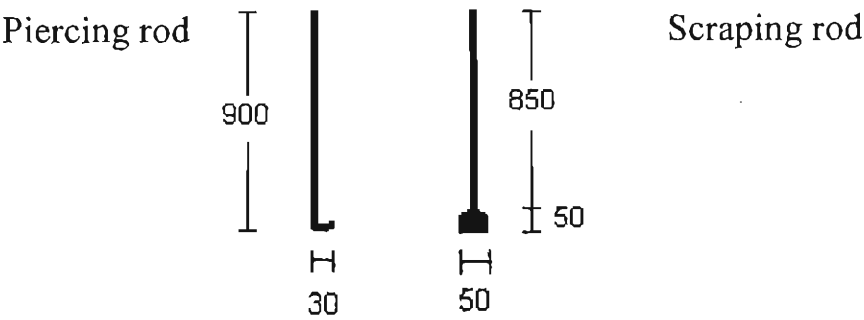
Tandoori bread unloading rods (All dimensions are in mm)
